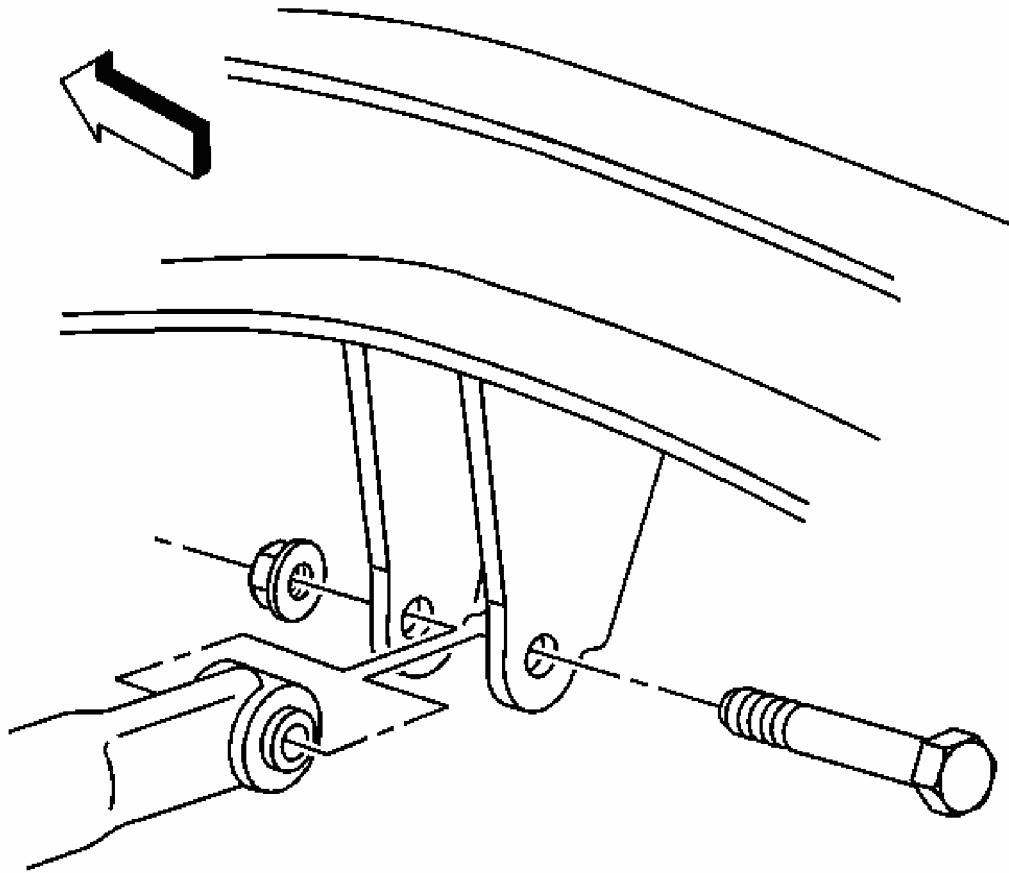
View Of Rear Tie Rod Mounting Frame Bracket
